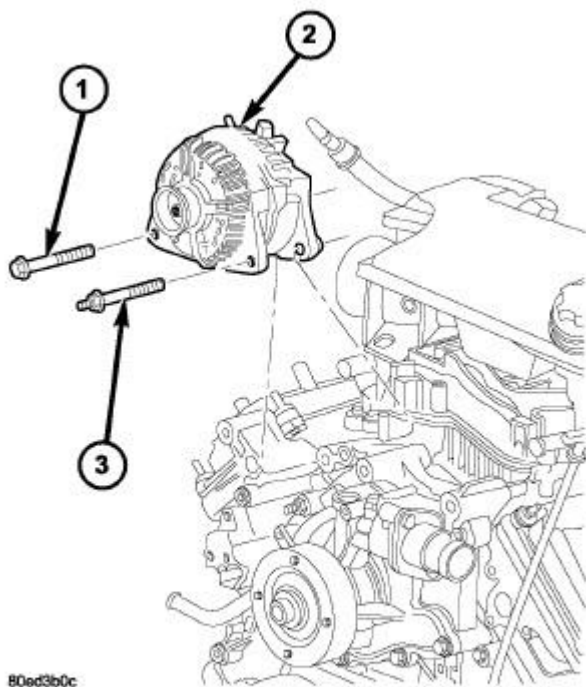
REMOVE / INSTALL GENERATOR - 5.7L
